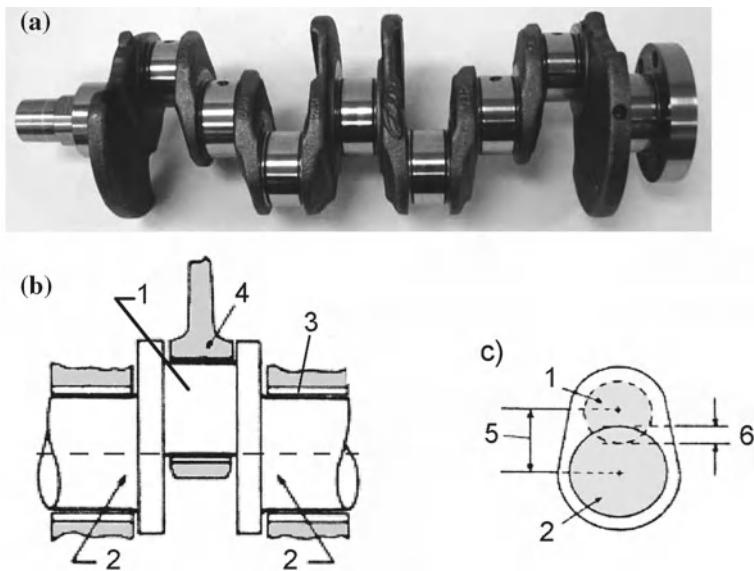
Engine crankshaft of a four-cylinders in-line engine (a); webs connecting the main bearings with the crank pins (b); overlap between main journal and crankpin (c)
